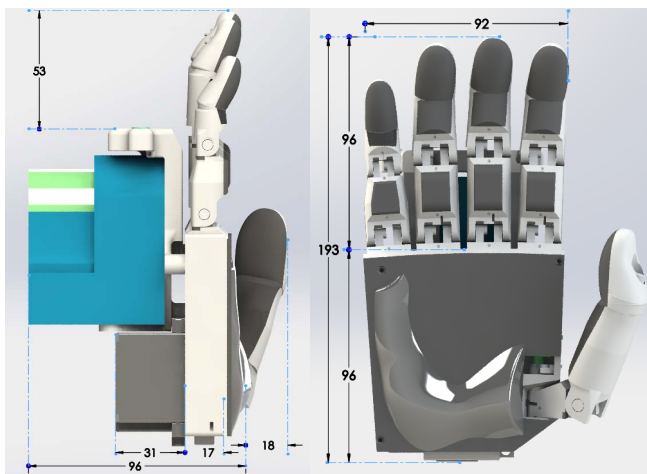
Side (left) and bottom (right) views of the NU Hand with dimensions (All dimensions are in mm).
